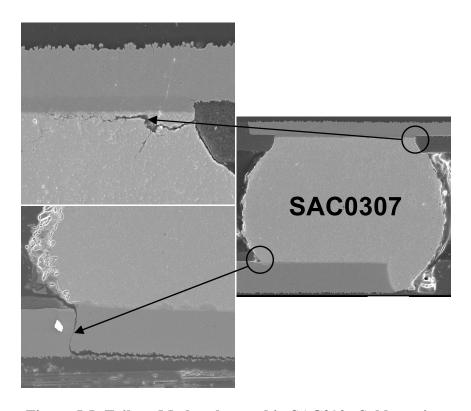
Failure Modes observed in SAC0307 Solder Joints
